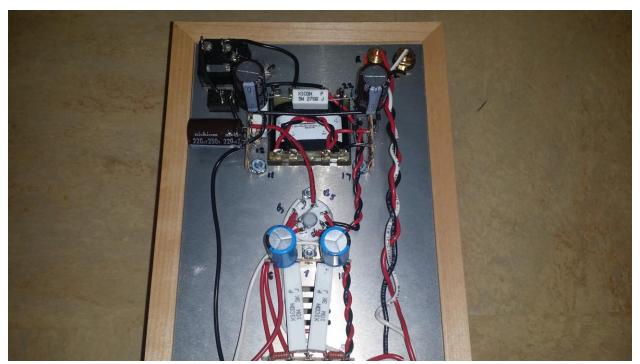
Faceplate Bottom Wiring; Top Half View.
